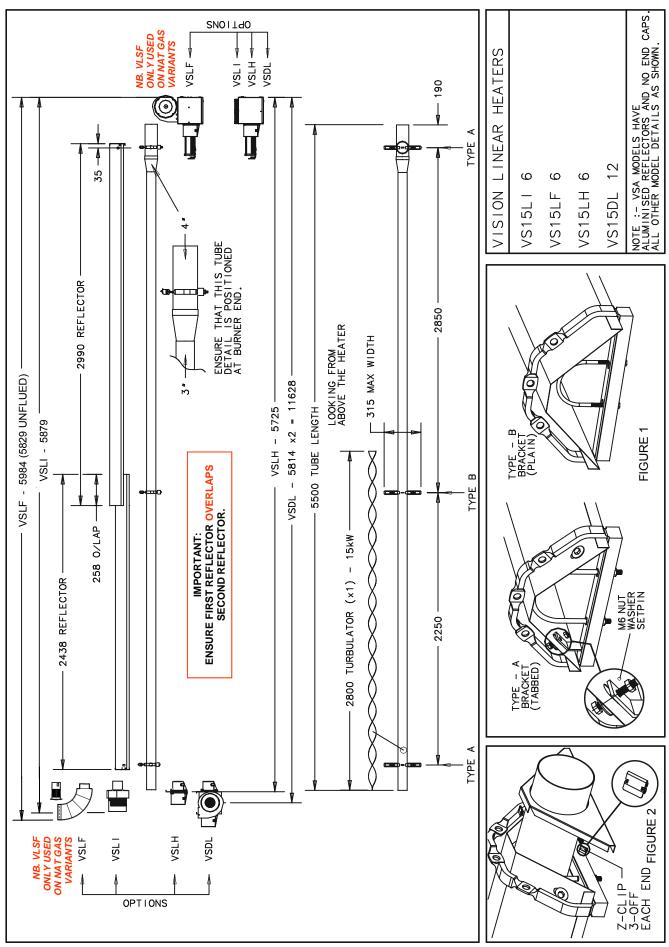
Vision Heater Assembly: Models VSLF/VSDL/VSLHB 15kW 6m - 75mm (3ins) Nom Dia.
